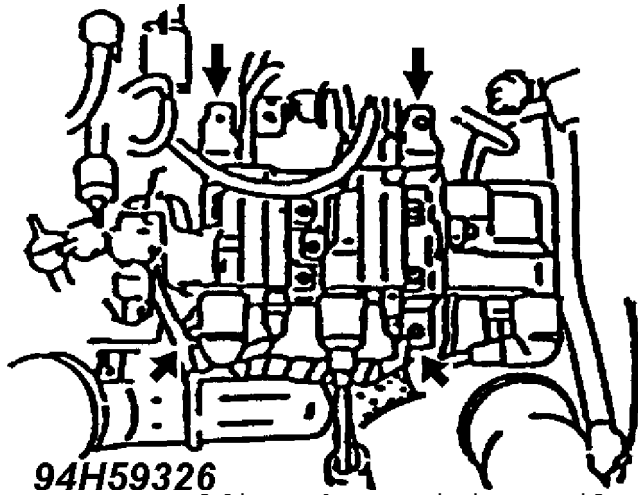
Four Nuts Holding the Ignition Coil Assembly
